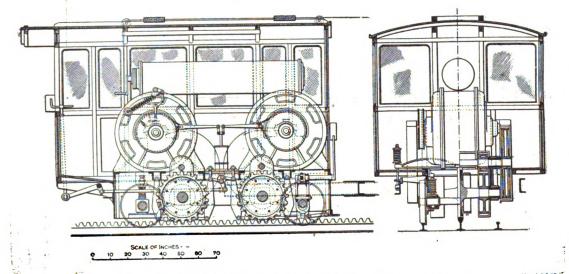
ELEVATION AND SECTION OF LOCOMOTIVE, SHOWING GEAR.
